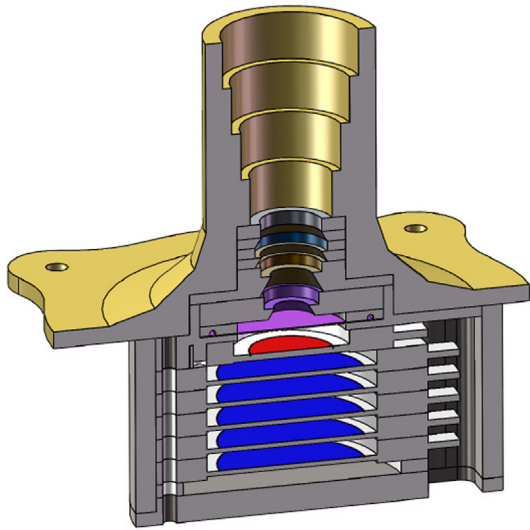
The Schematic cross section of NSSC HEED head sensor.
